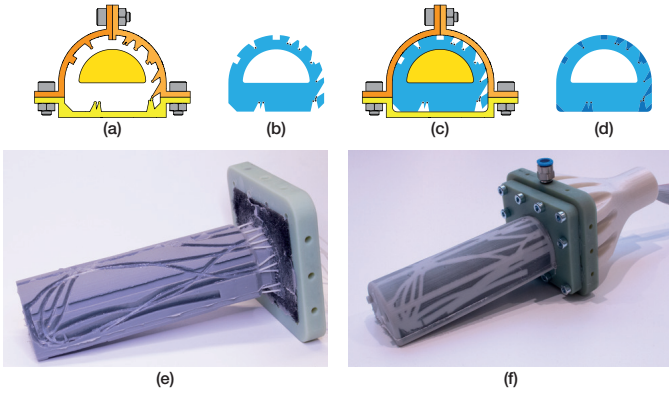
Gripper fabrication. Top row shows fabrication sequence, using a two-step injection molding process. In the first molding step (a) we add grooves along which the sensors will be placed. Silicone tubes are then routed along the grooves (b), after which a second molding step (c) fills the grooves and embeds the sensors inside the silicone (d). Bottom shows Gripper before second molding step, with silicone tubes placed into the grooves (e), and the finished Gripper (f).
